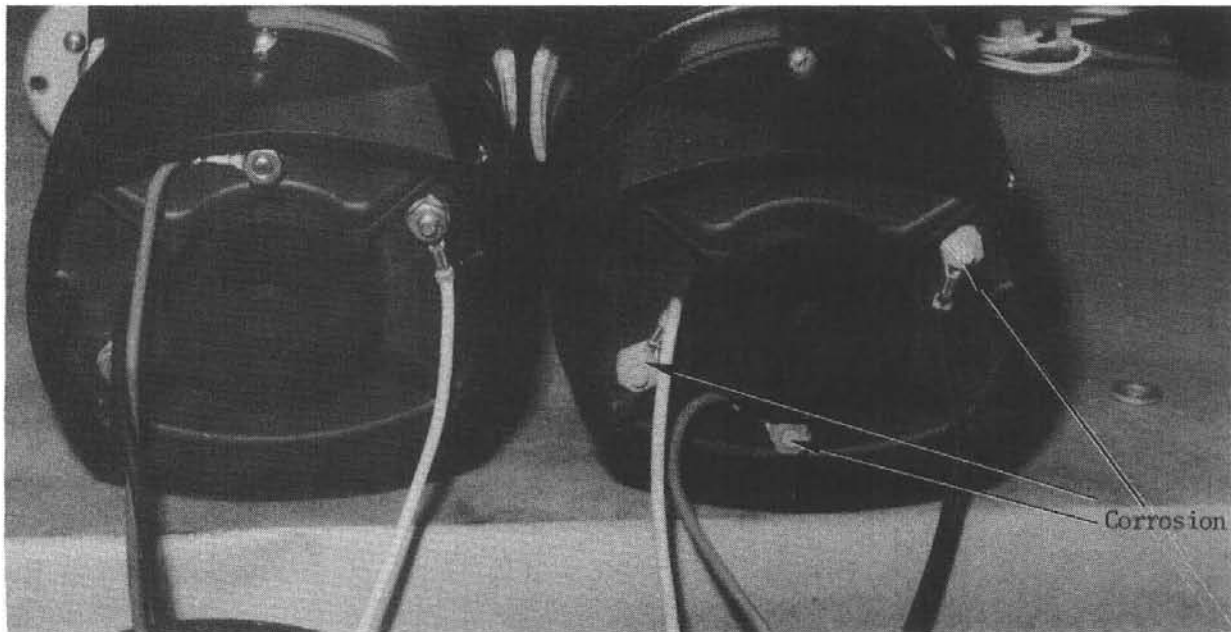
MMC Drive Motor with Bell Covers Removed after Test
